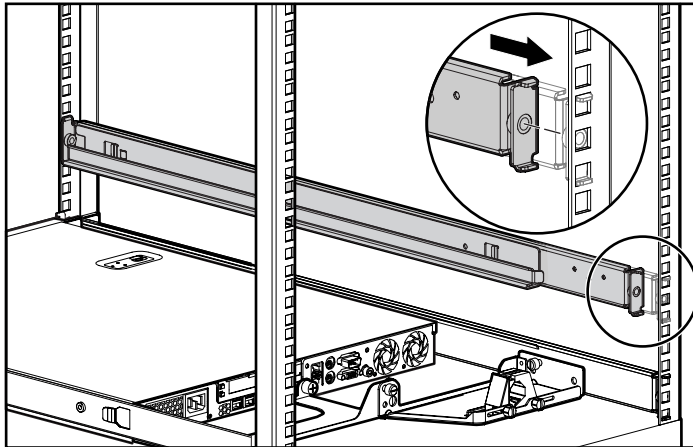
Aligning the rear tabs of the fixed rack rail with the rear holes (rear view)
